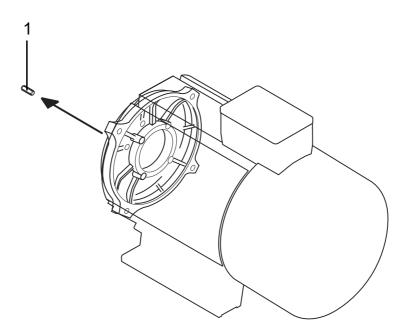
Preparatory disassembly of flange mount (BG 160 model)
